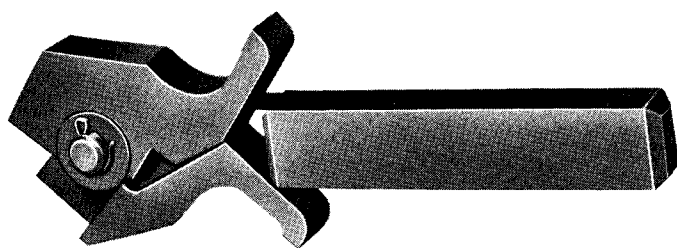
A Bearing Remover, Cat. No. 317648 wings folded for passing through the bearing
